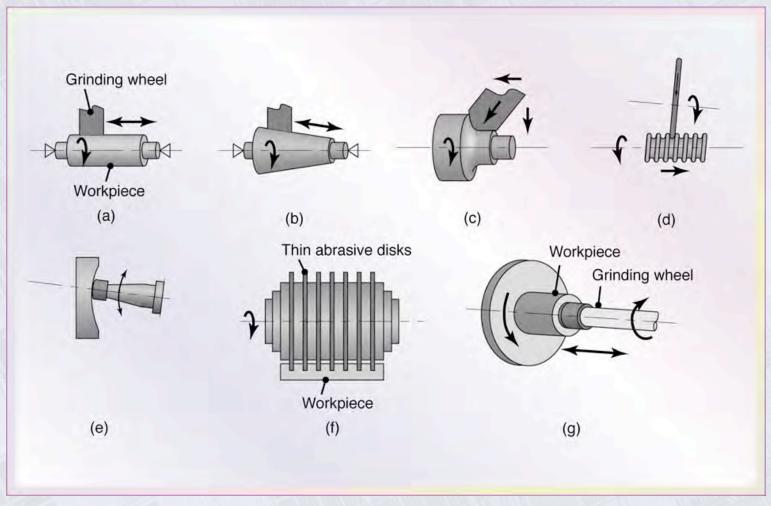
The types of workpieces and operations typical of grinding: (a) cylindrical surfaces, (b) conical surfaces. (c) fillets on a shaft, (d) helical profiles, (e) concave shape, (f) cutting off or slotting with thin wheels, and (g) internal grinding.
